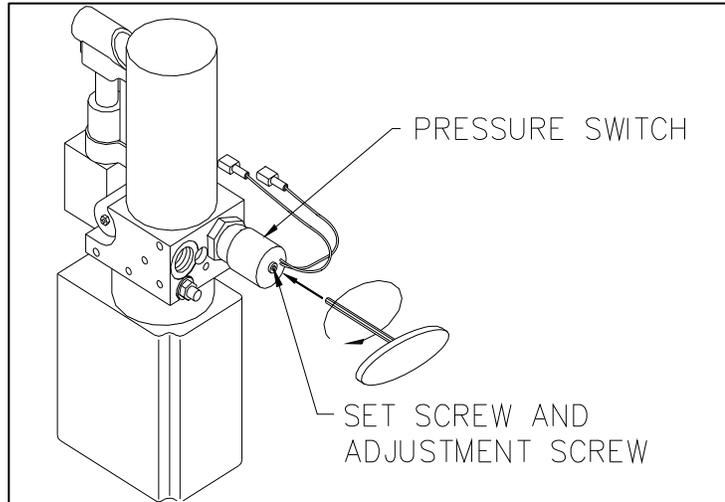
PRESSURE SWITCH TEST AT FLOOR LEVEL
